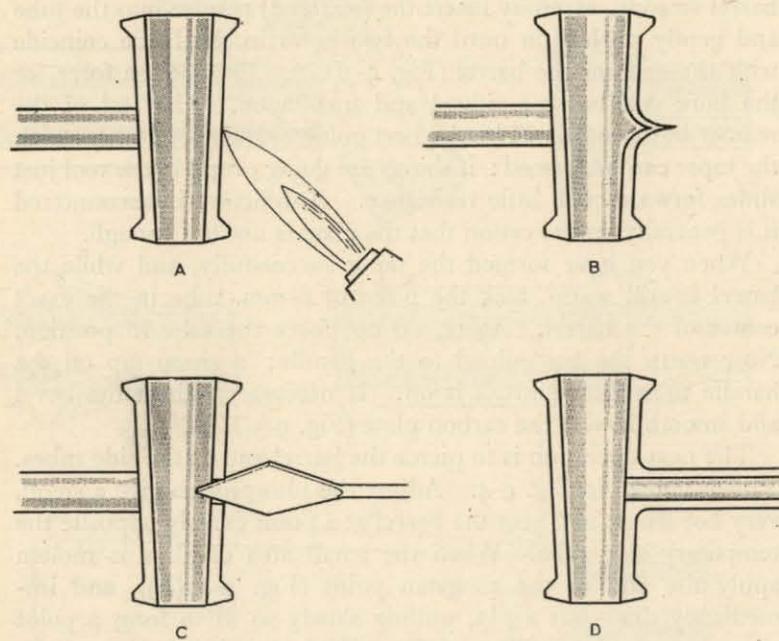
METHOD OF PIERCING BARREL AND FITTING SIDE TUBES
